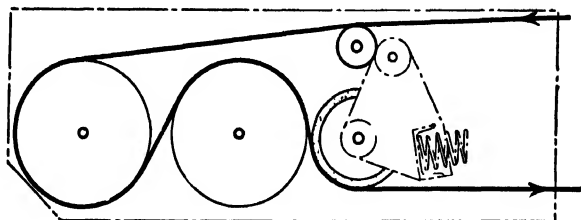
Two-drum Mangle-roll Drive. (Mining Engineering Company, Ltd.)
